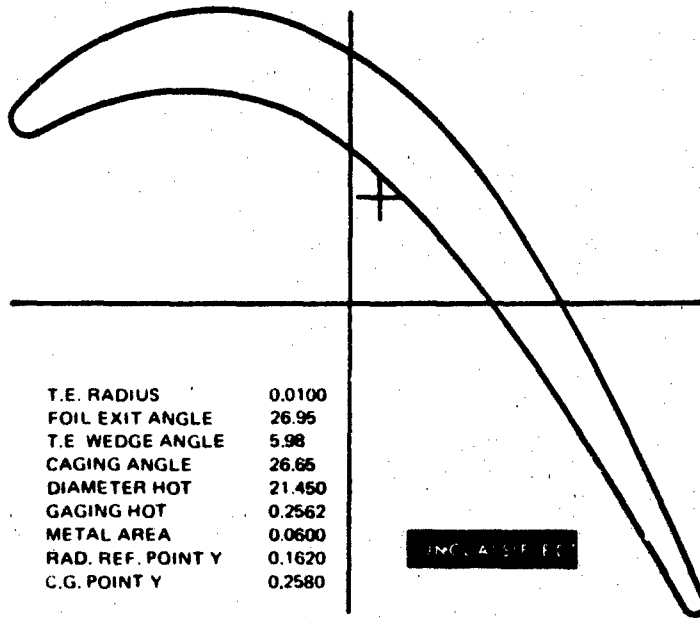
Section D-D, Second Blade 1/4 Tip, Cylindrical
